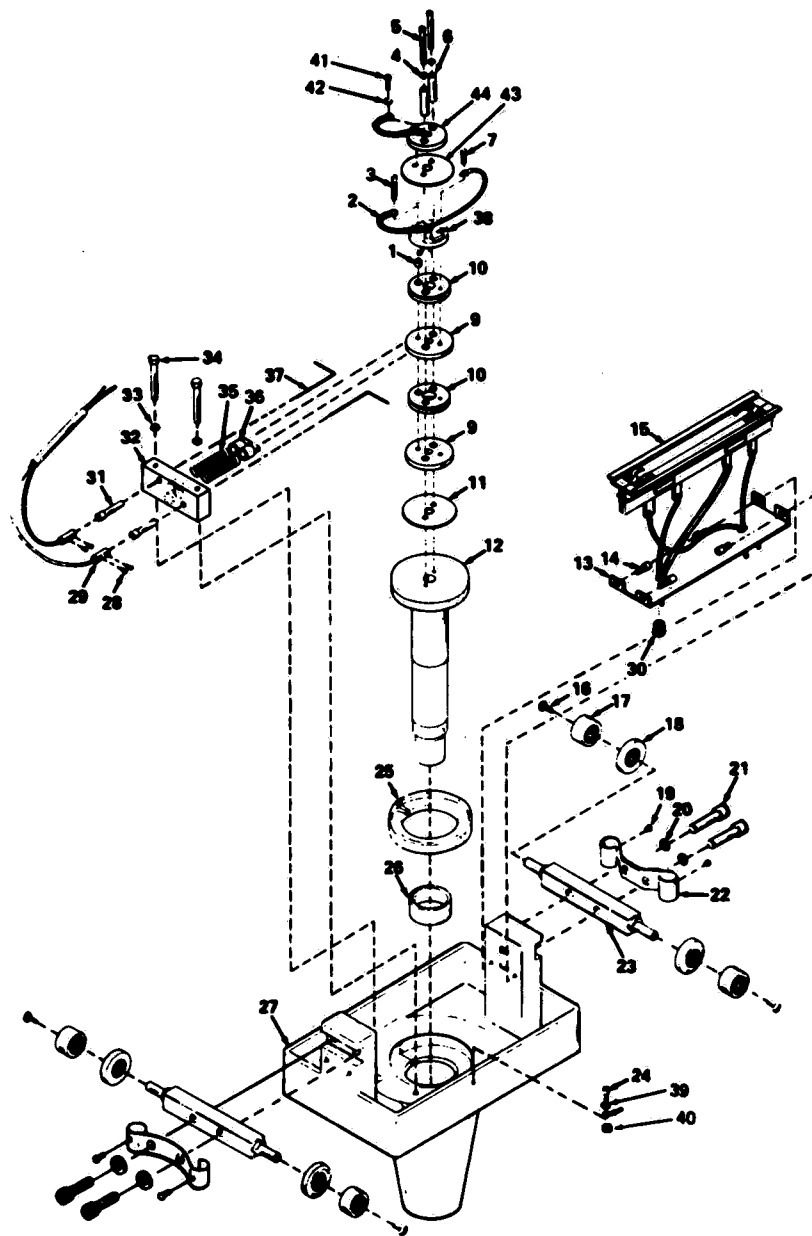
B. CARRIAGE ASSEMBLY, Units Shipped After 7/82.
